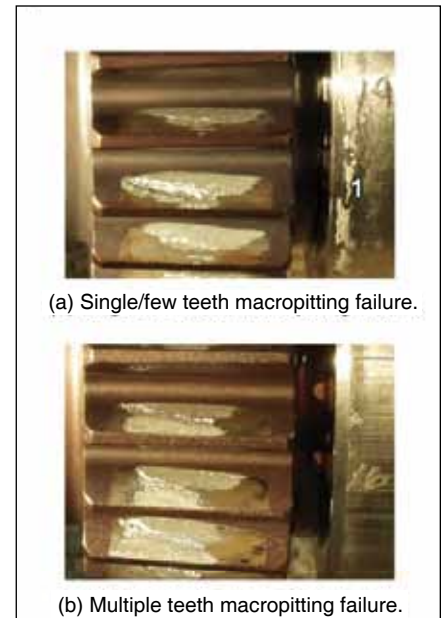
Typical macropitting pinion tooth surface fatigue failures.
